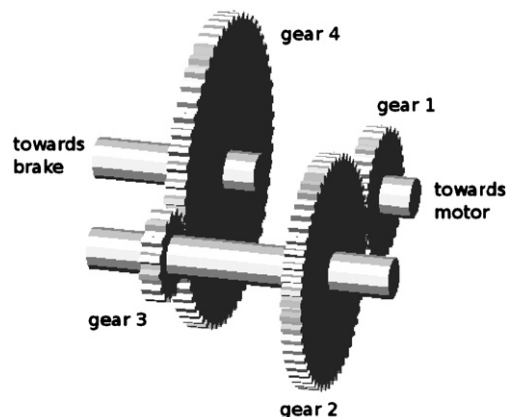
Gearbox scheme, showing the four gears. Defects were introduced to gear 1.
